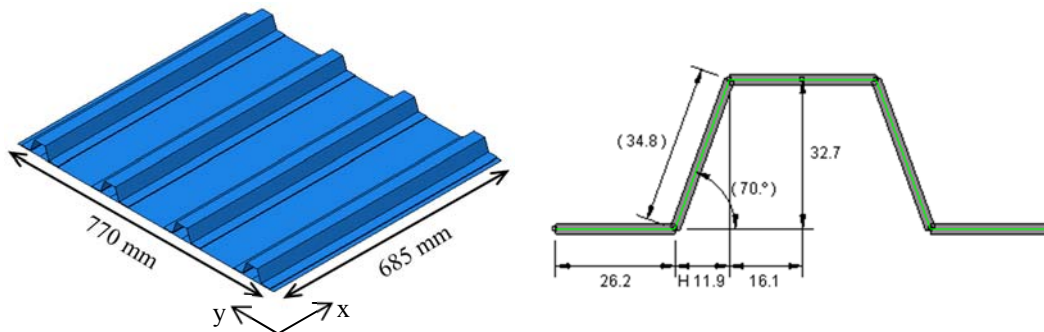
Four-stringer panel: geometry and stringer dimensions in mm.
